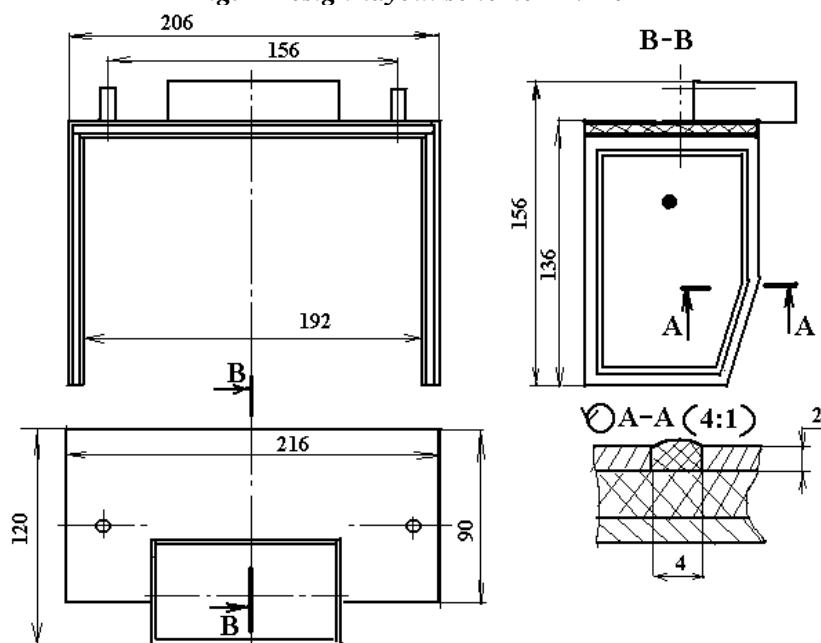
Design-layout scheme of the DDZ-01 sensor
